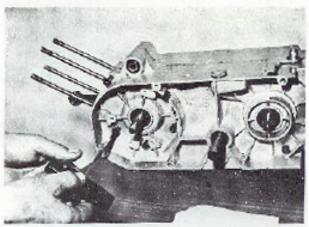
Loosen and remove the 13 6mm allen screws which hold the two halves of the crankcase together.
